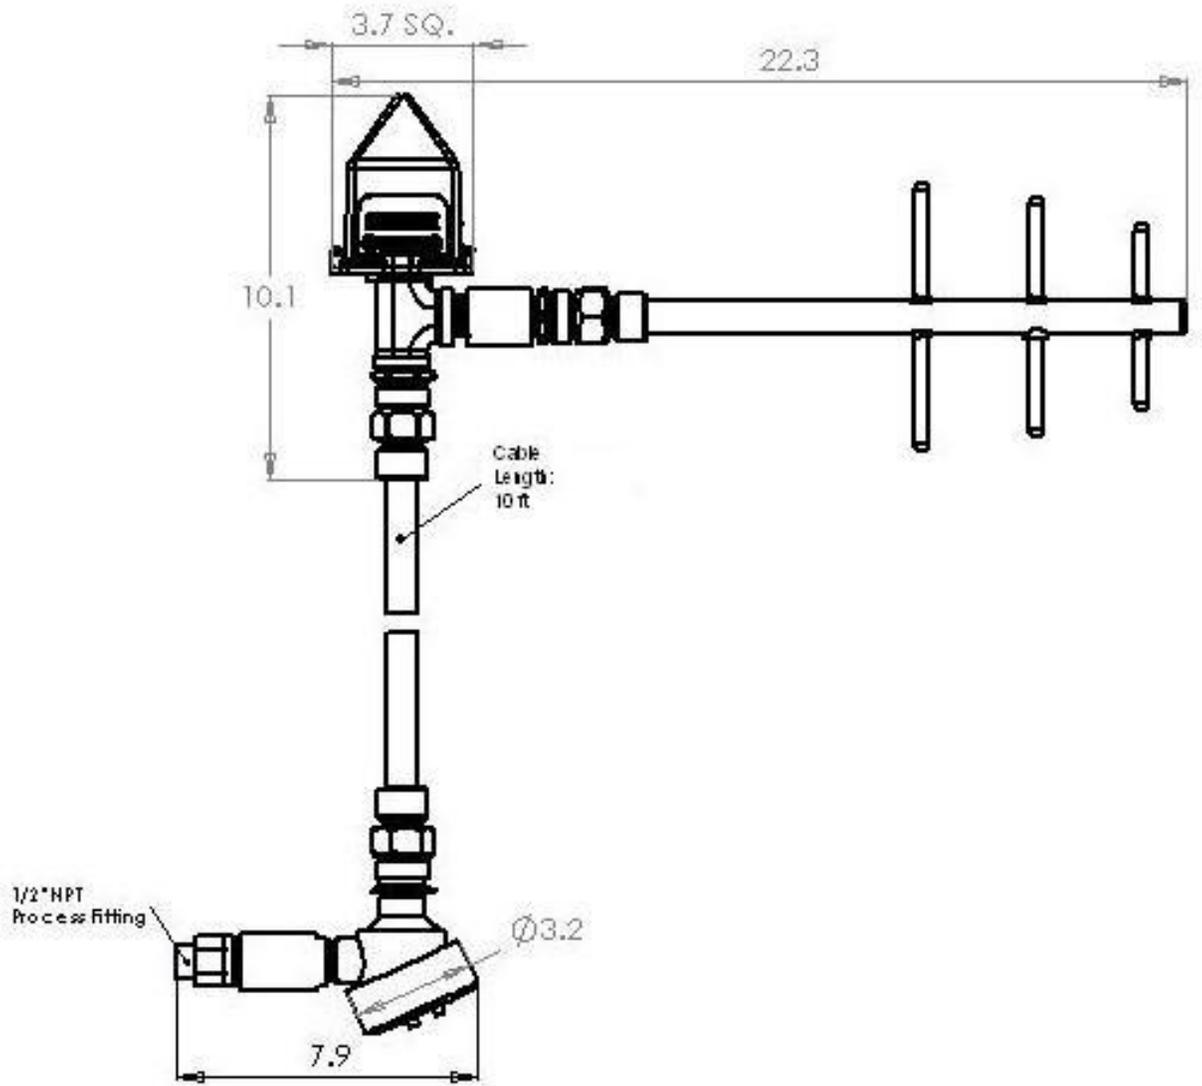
WI-GL-E-Y6-XX Dimensioned Mechanical Drawing
